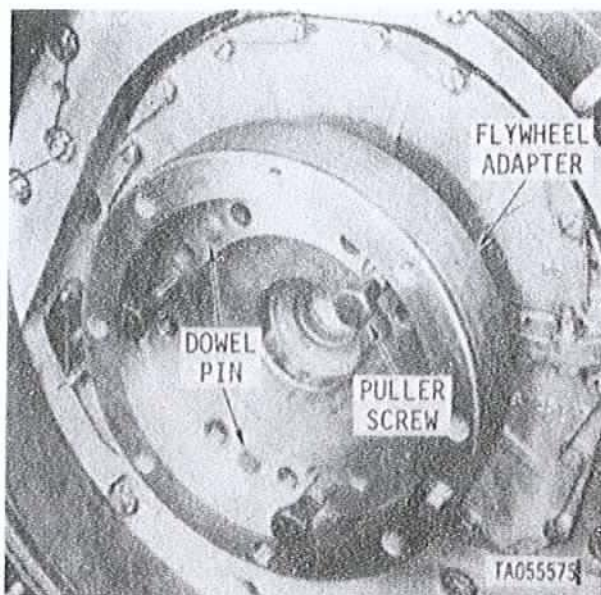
Removing flywheel adapter machine bolts and lock plates, model AVDS-1790-2DR engine.
